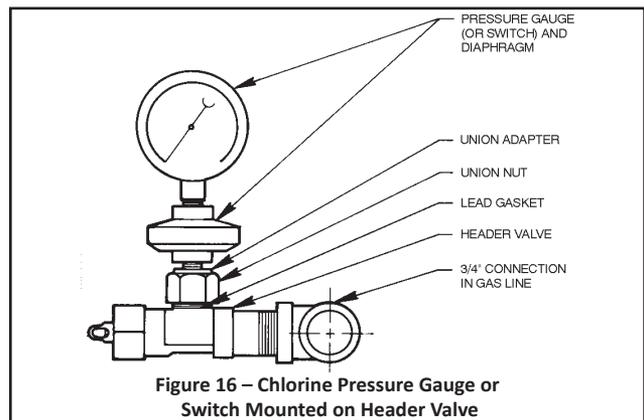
Chlorine Pressure Gauge or Switch Mounted on Header Valve
